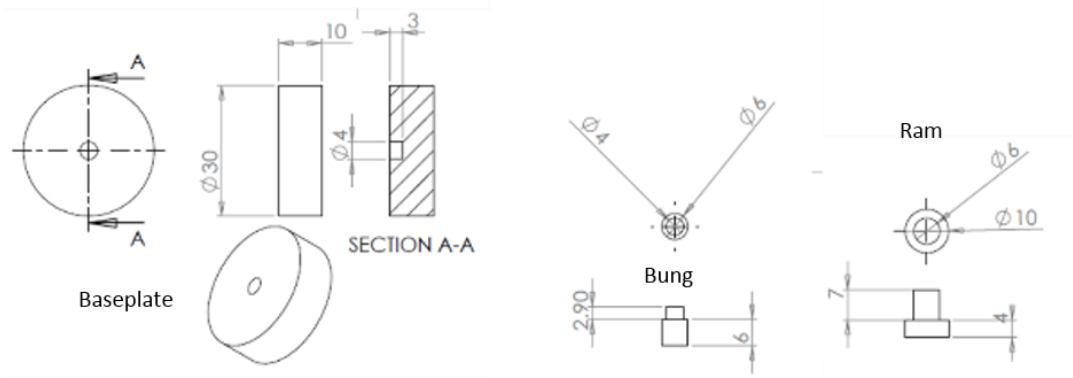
Three part hoop stress rig, with dimensions in mm.
